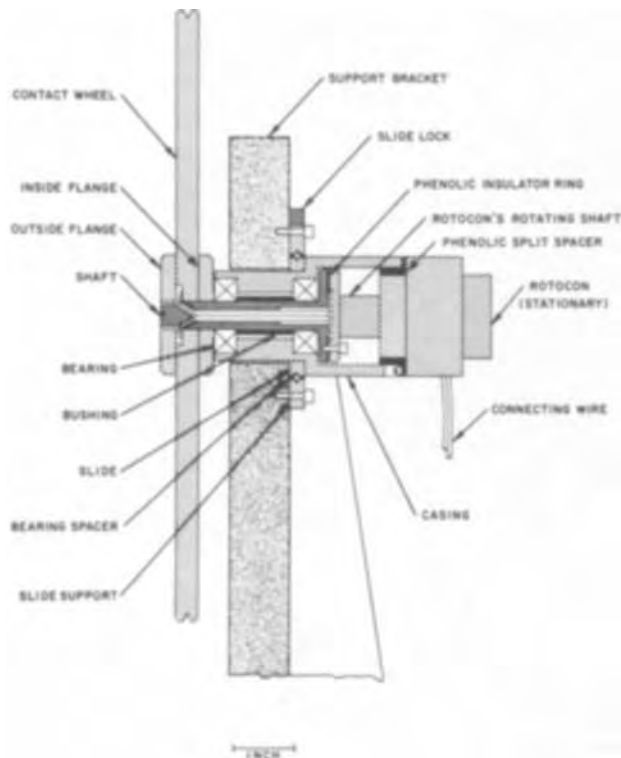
Cross section of the sliding contact wheel and rotating contact unit.
